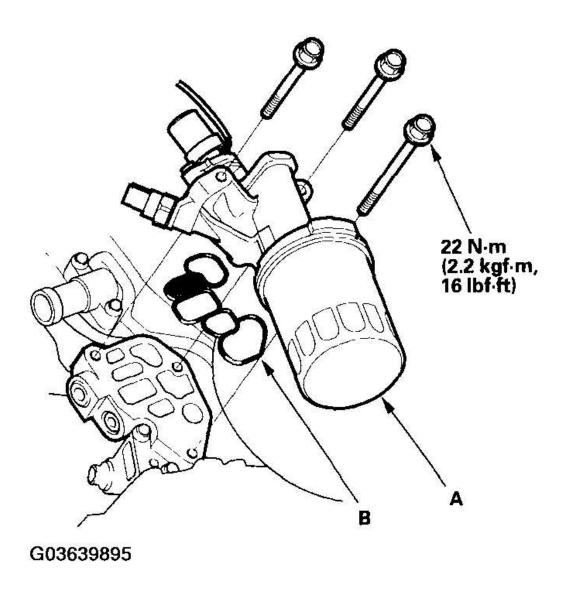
Removing Rocker Arm Oil Control Solenoid (VTEC Solenoid Valve)/Oil Filter Assembly Courtesy of AMERICAN HONDA MOTOR CO., INC.
